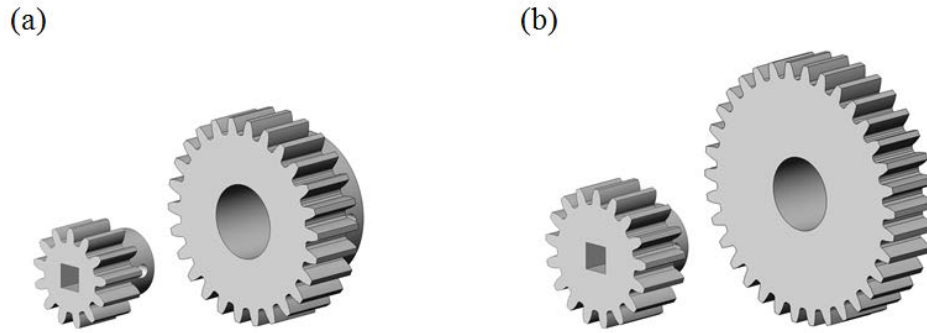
Screw and gearmotor gear sets for (a) co-rotating and (b) counter-rotating screw rotation orientations, respectively.
